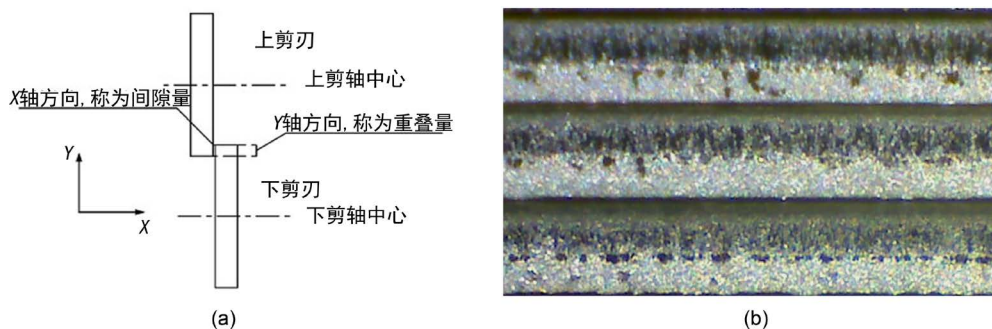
Principle of mechanical cutting and sectional drawing of steel plate (B23P085)
